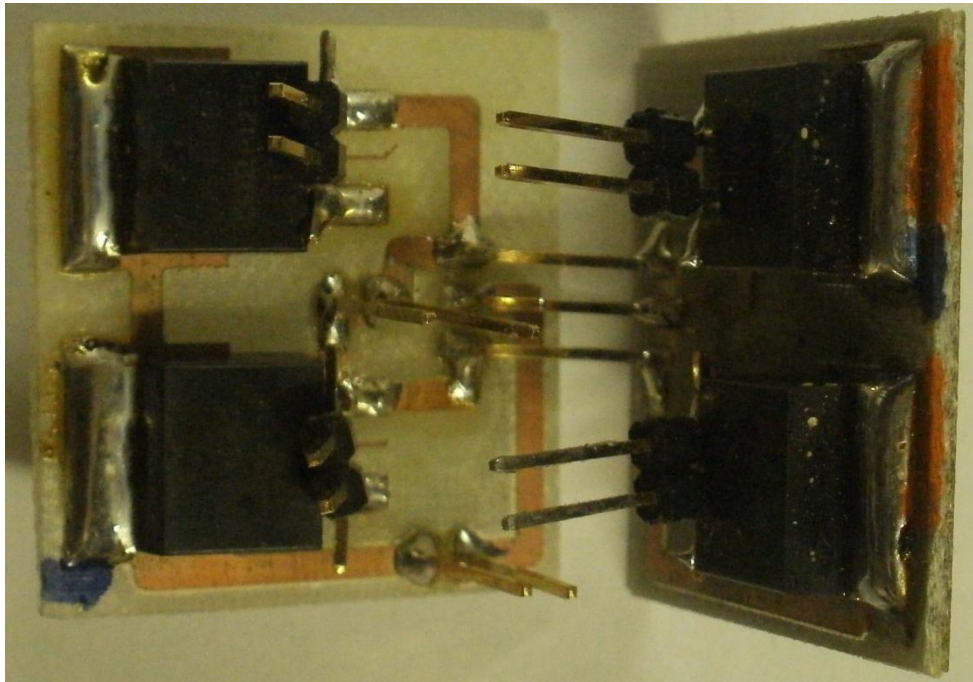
Device Under Test 3 PCB (3 Dimensional)
